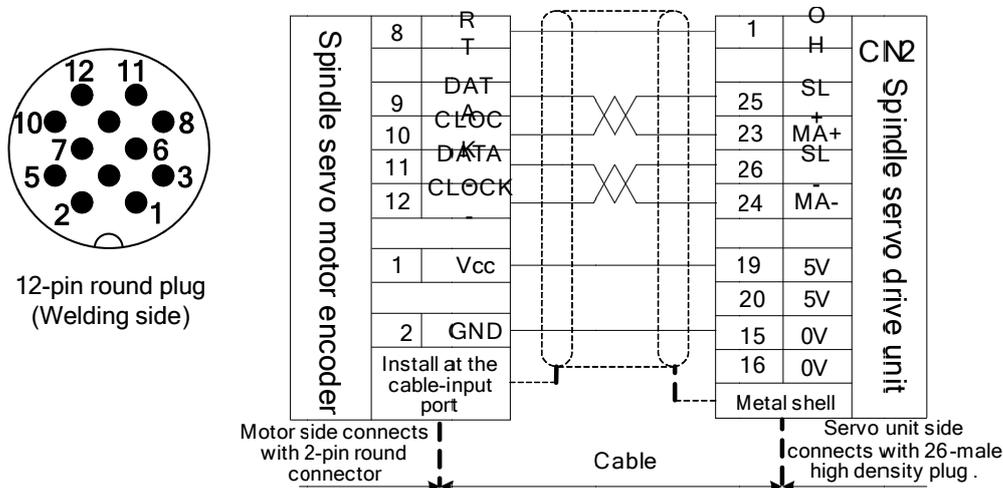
CN2 matches with ZJY series spindle motor encoder/12-female industry plug wiring
